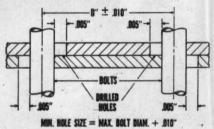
Piece Designed with Tolerance on Hole Size to Produce Minimum Clearance in Each Hole, Over Maximum Bolt Diameter, Equal to Tolerance Between Hole Centers
